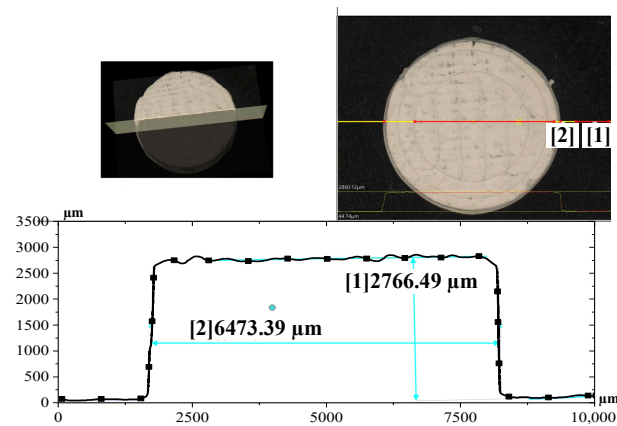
2D cut surface profile of the FDM-printed DRA.
